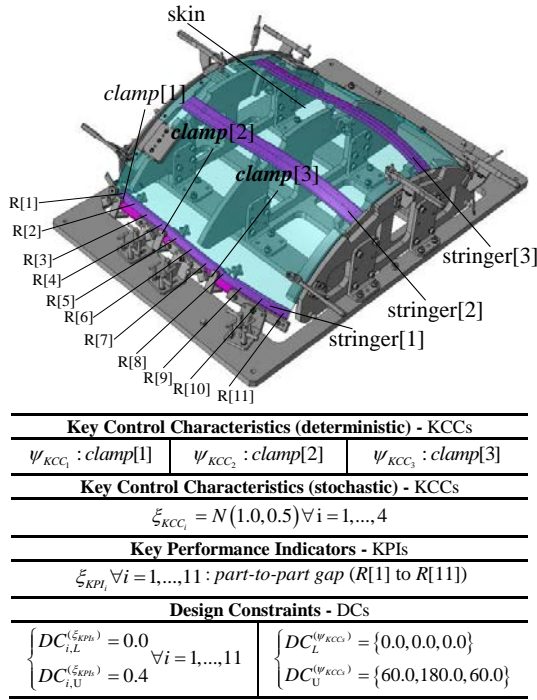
Aerospace wing sub-assembly joined by riveting technique.
